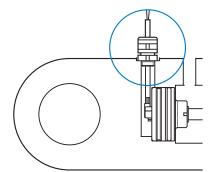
Encoder installed in the hydraulic cylinder with cable connector and cable gland
